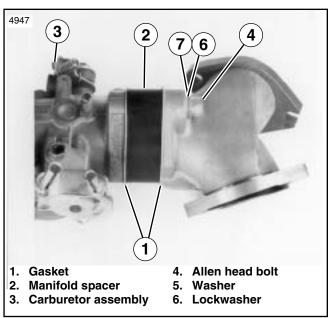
Manifold, Spacer, Gaskets and Carburetor
